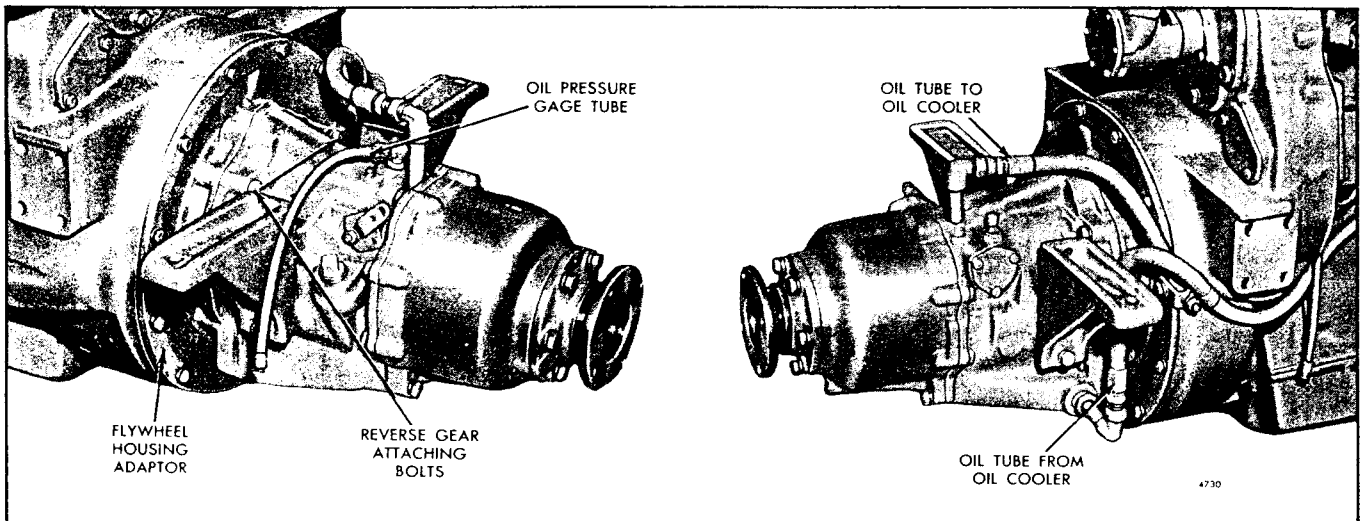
Reverse and Reduction Gear Mounting to Engine (Current)
